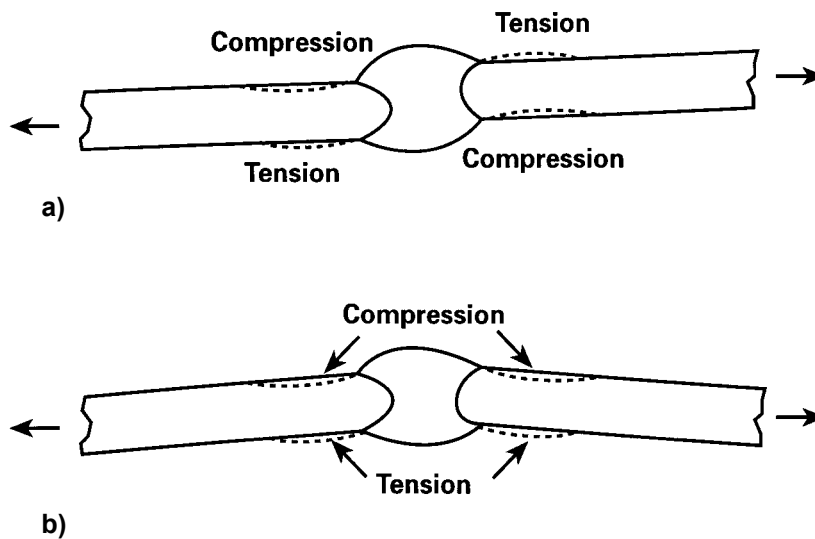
Secondary bending stresses arising under tensile axial loading in welded joints containing a) axial and b) angular misalignment.
